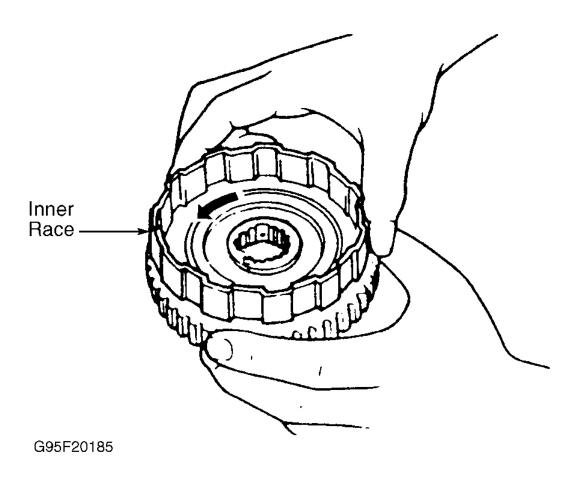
Checking One-Way Clutch No. 1 Operation Courtesy of MAZDA MOTORS CORP.
